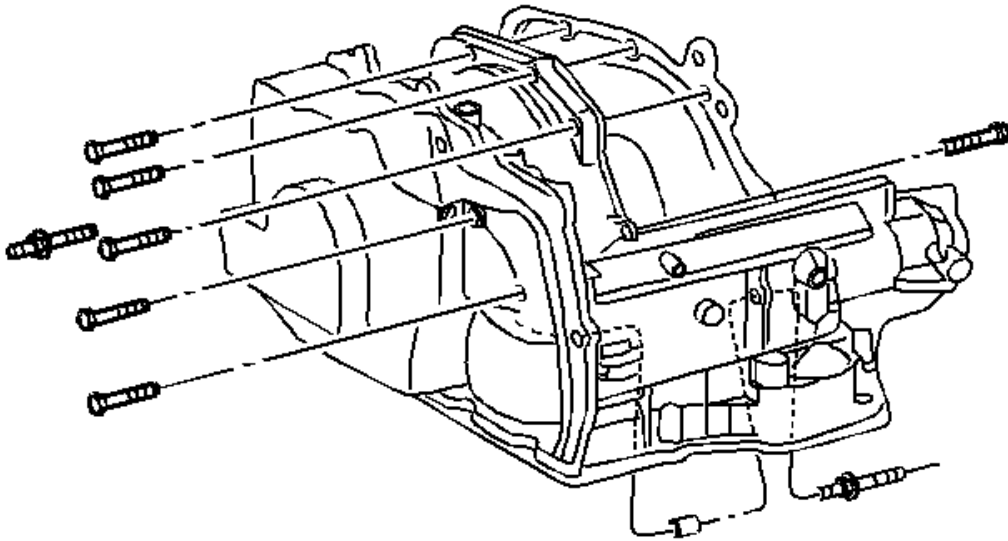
Identifying Lower Transmission To Engine Bolts And Stud
